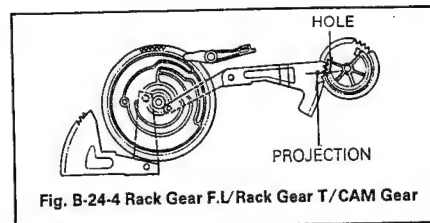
Rack Gear F.L/Rack Gear T/CAM Gear
